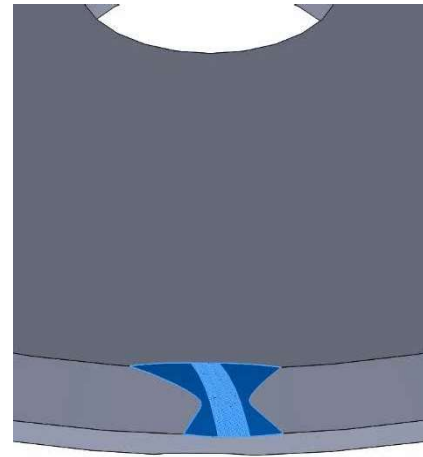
The cutting surface of the grinding wheel obtained after the screw removal operation
